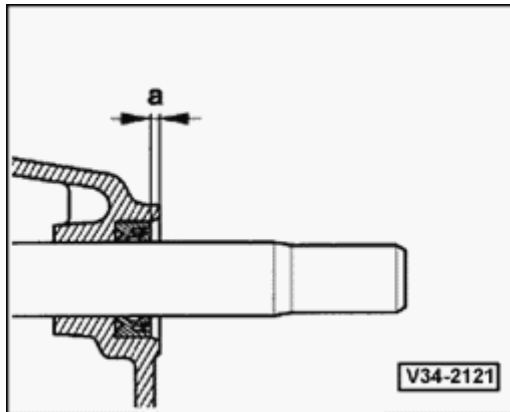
Removing bushing for 3rd and 4th gear shift rod
